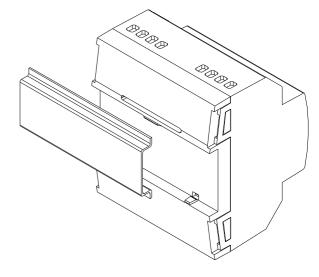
MAXinBOX FANCOIL 2CH2P DIN-rail assembly
